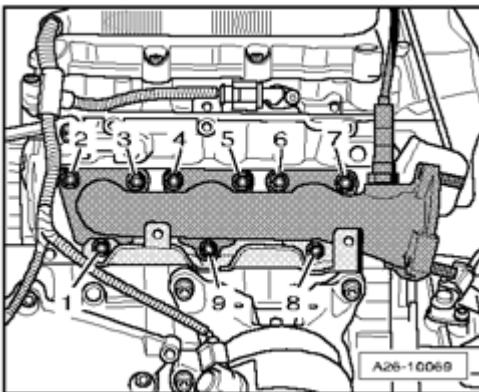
Removing Nuts, Bracket For Heat Shield & Exhaust Manifold
